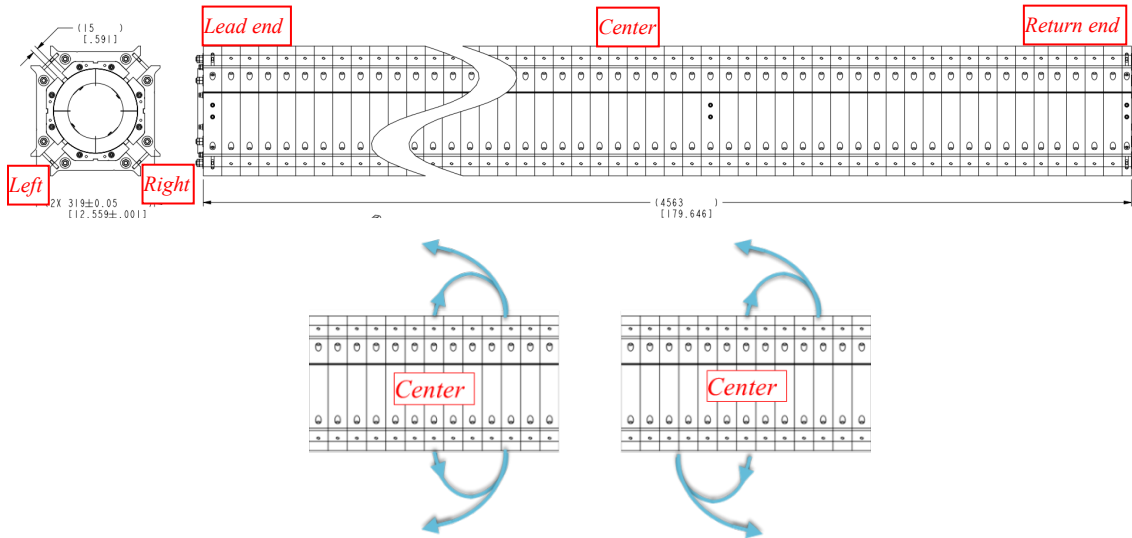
Coil pack sub-assemblies: on top, cross-section (left) and full 3D view (right) with the series of bolted pads around coil and collars. Bottom: sequence of bolting before (left) and after (right) change #1.
